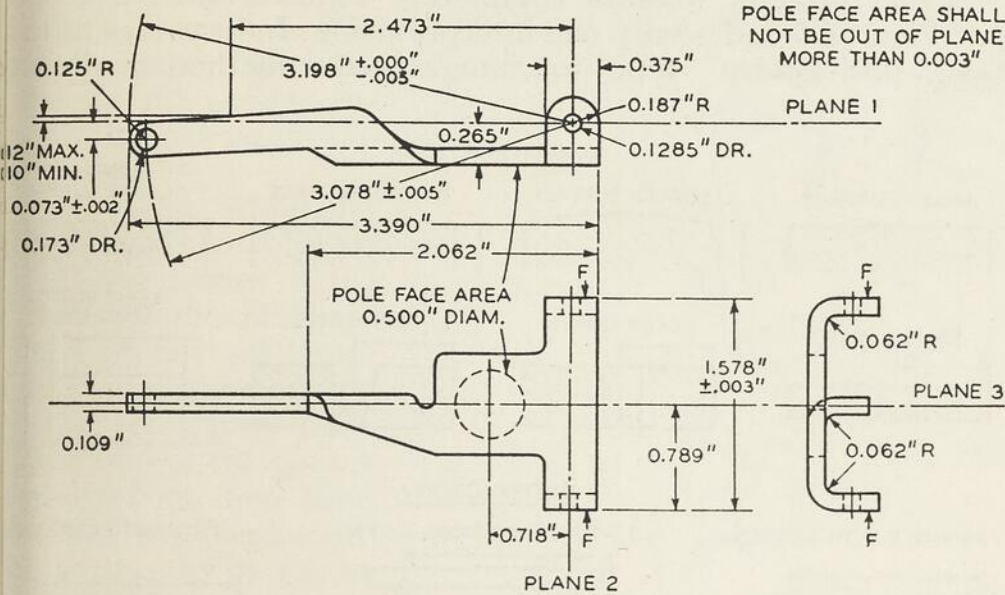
Functional datum plane dimensioning of magnetic armature type of part
